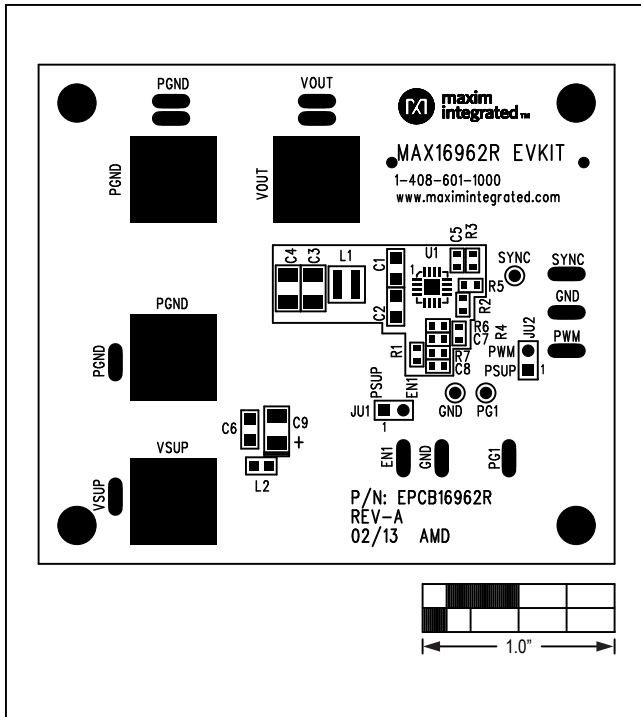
MAX16962R EV Kit Component Placement Guide—Component Side
